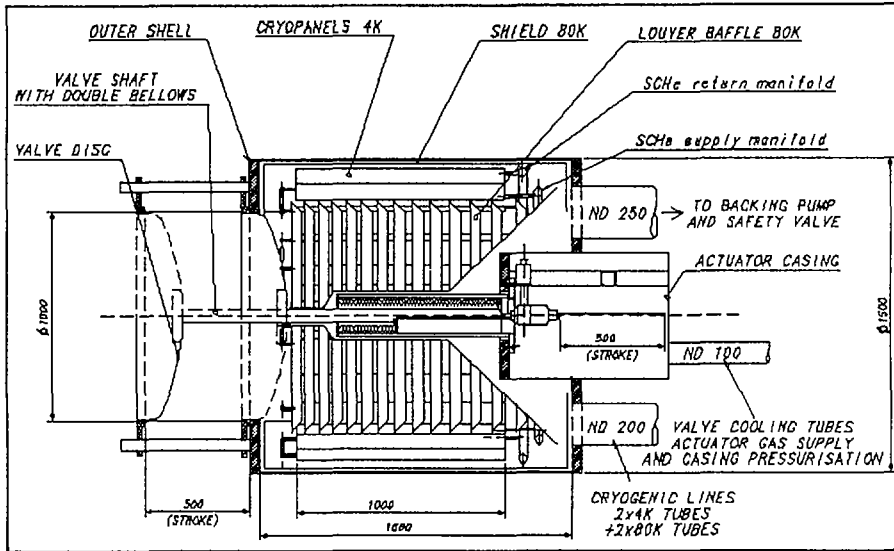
ITER primary cryopump — preliminary design (dimensions in millimetres).
